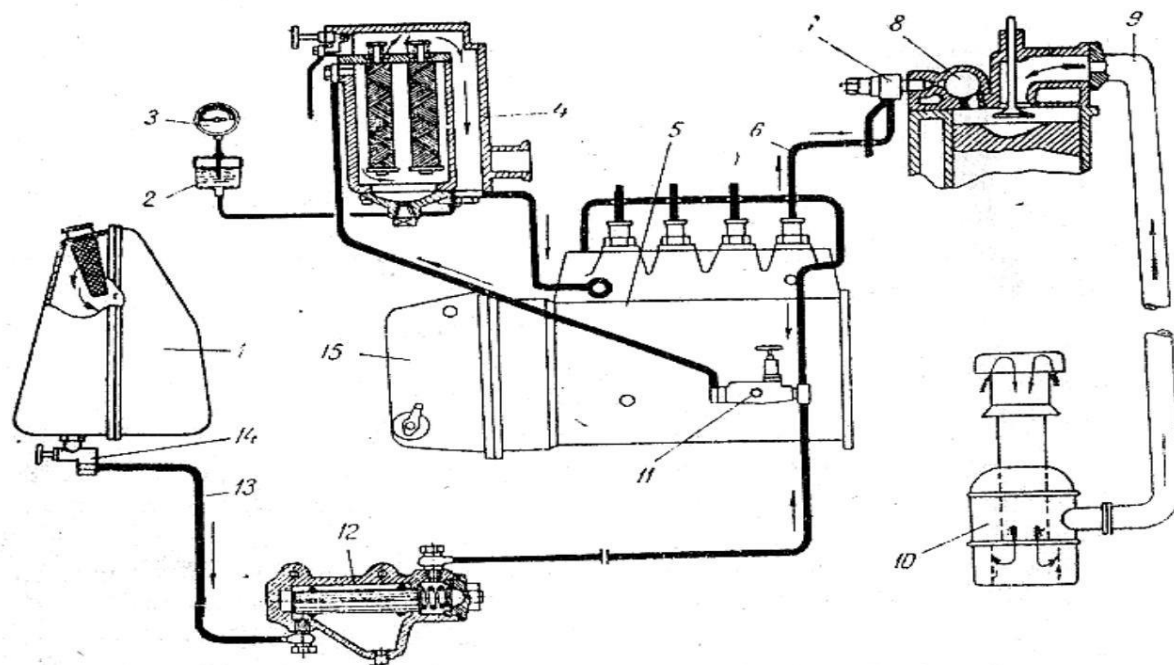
General scheme of the diesel engine supply system. 1-fuel tank; 2-tank; 3-manometer; 4-fine oil pipe; 5-fuel pump; 6-high pressure pipe; 7-injector; 8-combustion chamber; 9-pipe; 10-air cleaner; 11-fuel drive pump; 12 - coarse oil pipe; 13 - low pressure pipe; 14-crane; 15-speed regulator;
